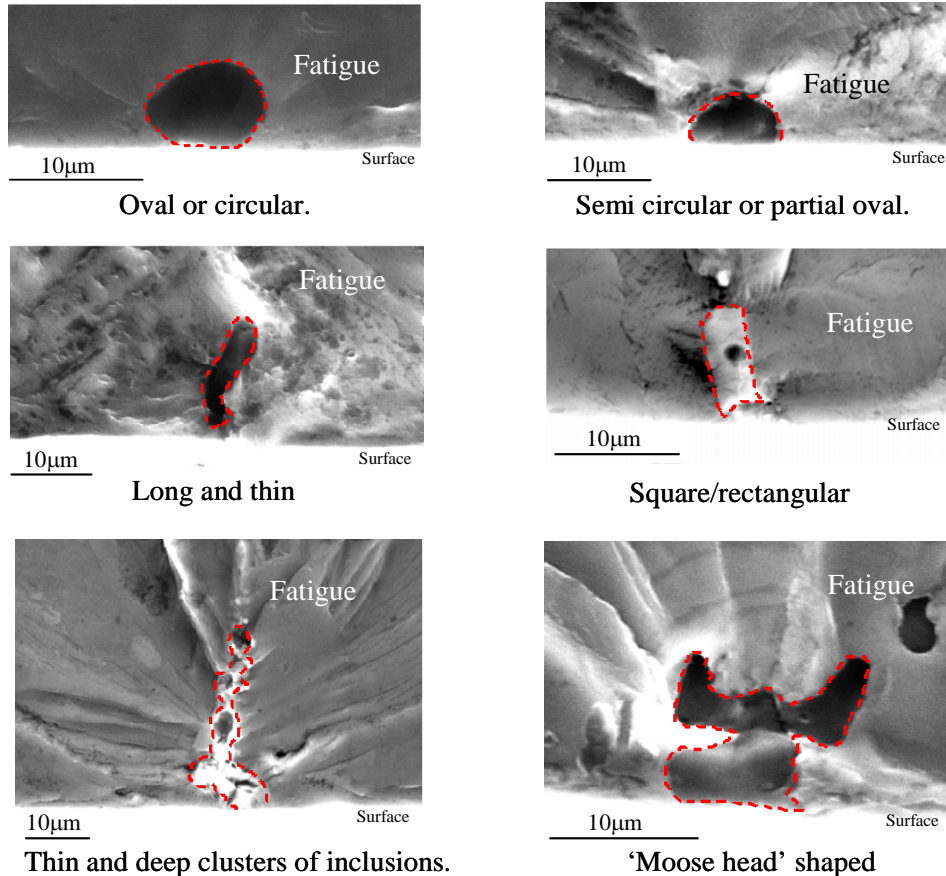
Examples of constituent particles that initiated fatigue cracking in as-machined and reamed holes in AA7050-T7451 fatigue test coupons. The red dashed lines bound the approximate shapes of the particles.
